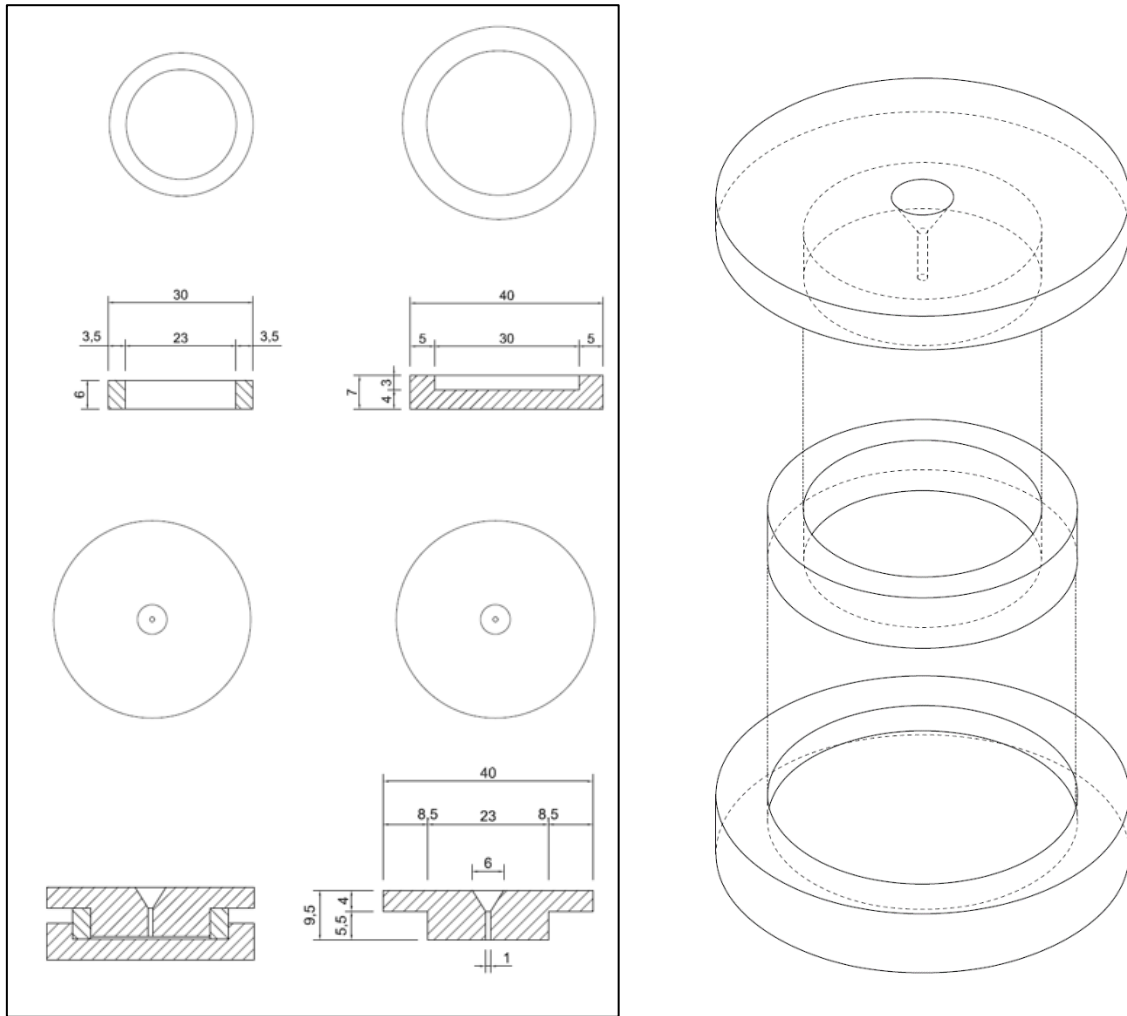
Clockwise from top left (in mm), Ceramic spacer, Bottom holder, Top holder, Complete holder (left), Exploded view of sample holder (right)
